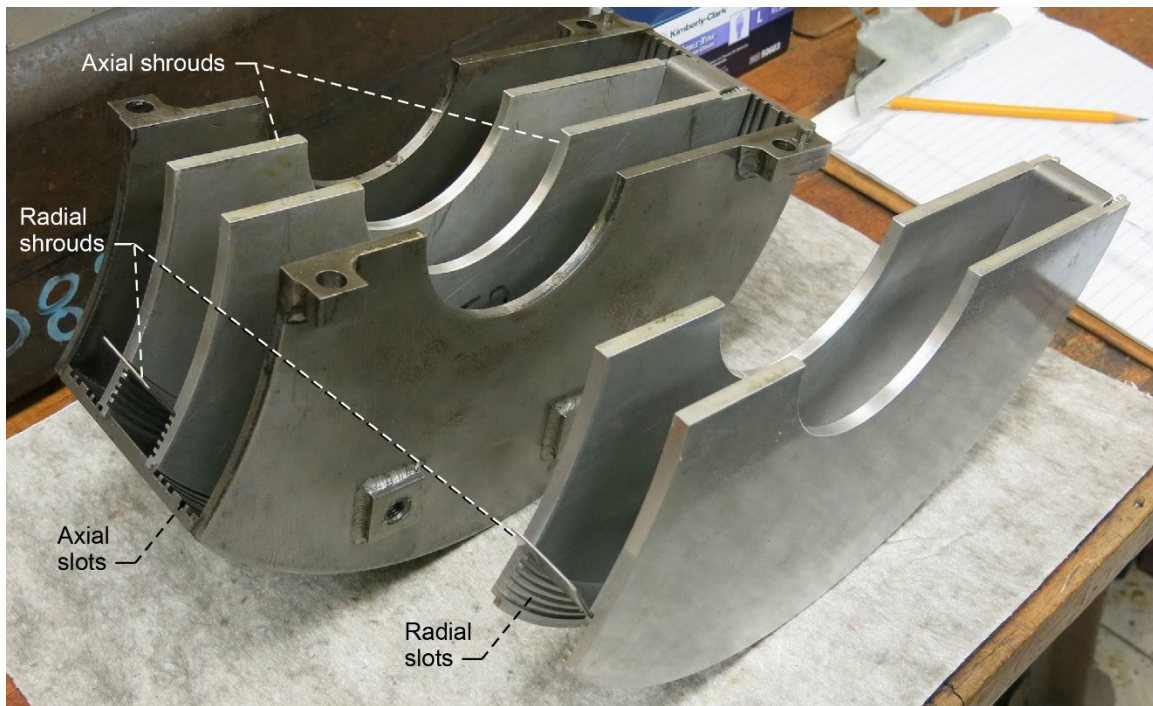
Quarter section of clamshell housing (drive side, upper half) locating axial and radial shrouds.
